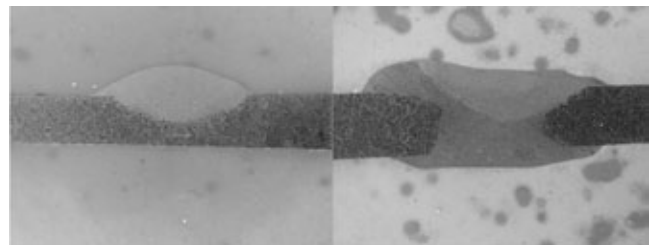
Macrostructures of welds and padding welds executed (Table 2, pos. 1)
